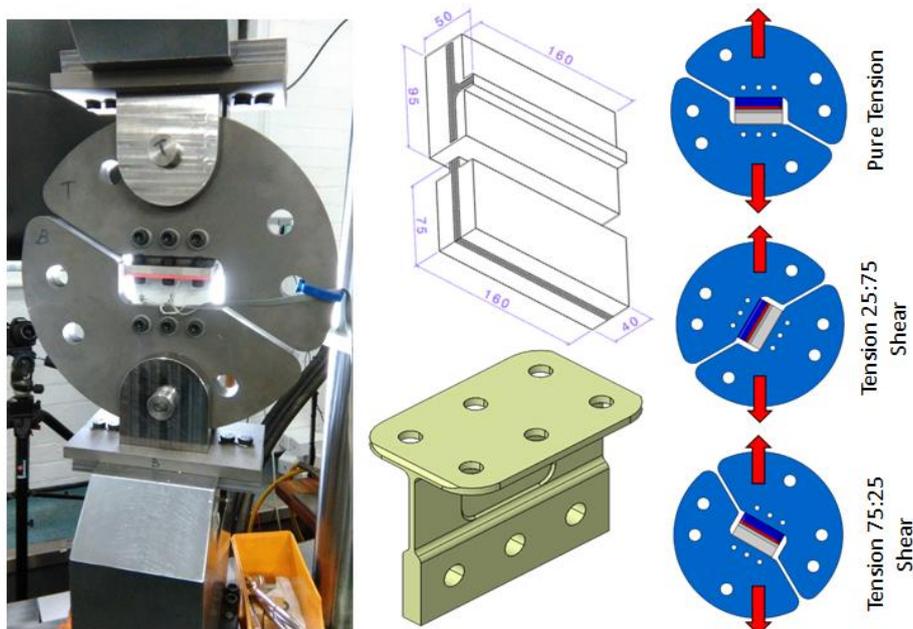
Experimental setup demonstrating the Arcan test fixture, initial weldment pieces, final test specimen geometry and the three test configurations for variable loading.
